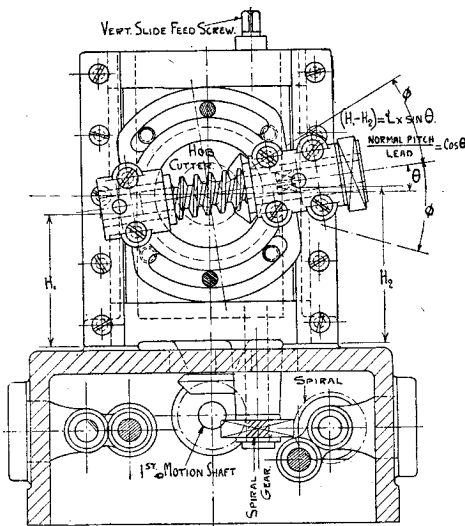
Plan with angle-bracket, slide and cutter box in section.
